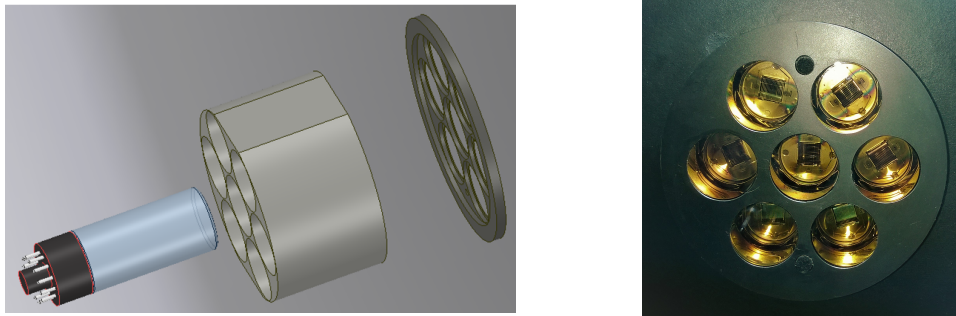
Left: Exploded view of the optical readout assembly. Right: PMT array.
